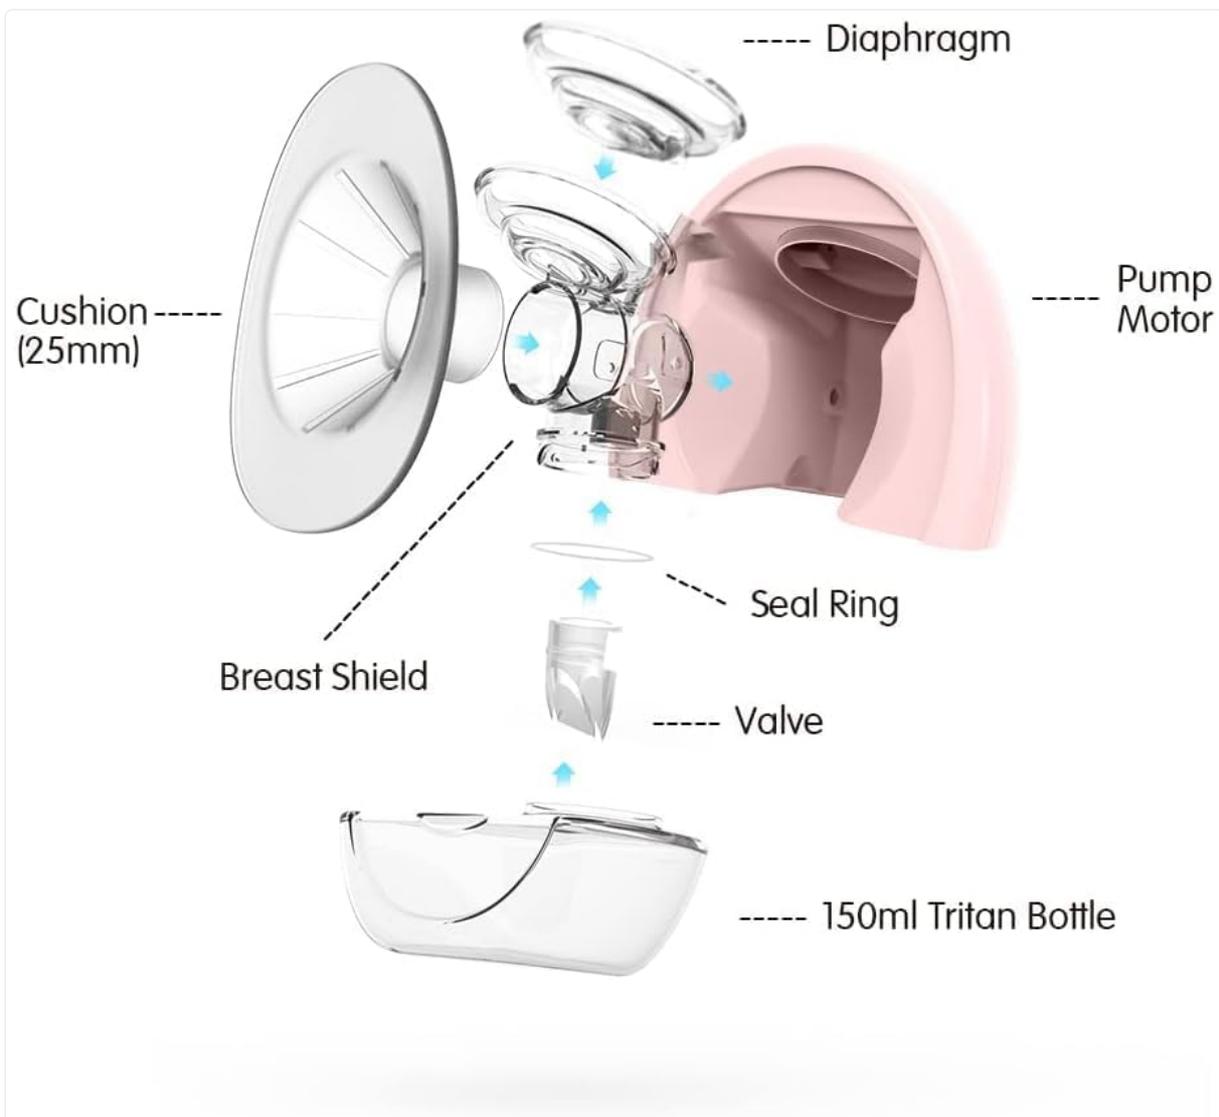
Exploded view illustrating the assembly order of the HORIZEN breast pump components, including the cushion, breast shield, valve, seal ring, diaphragm, pump motor, and bottle.
